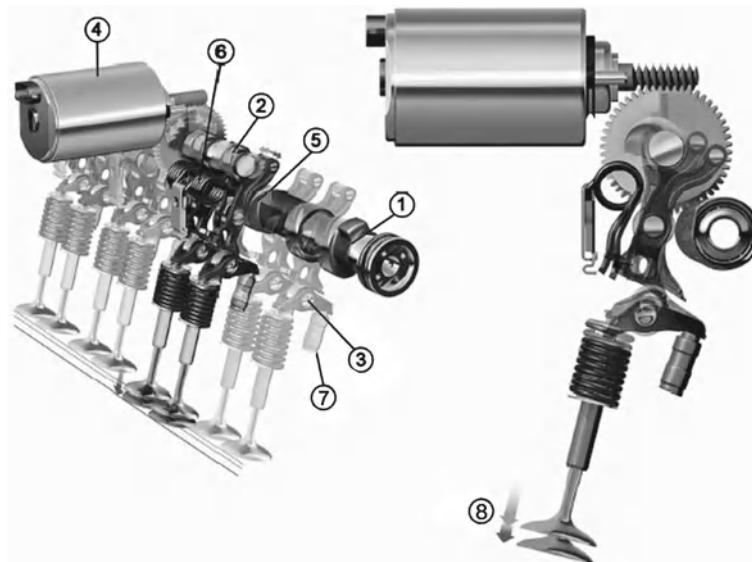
Schematic drawing of the Valvetronic mechanical variable valve actuation system
